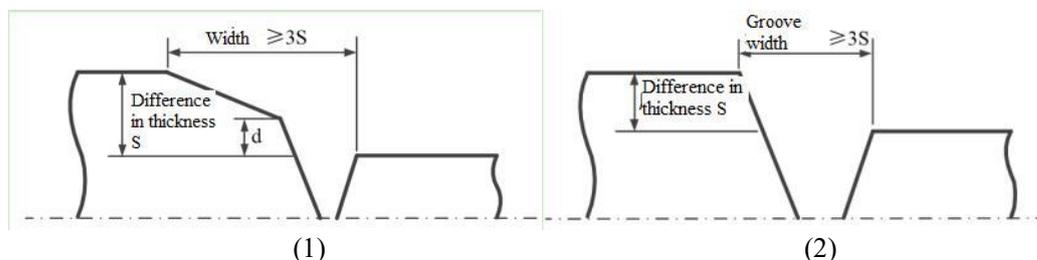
Butt welding of steel plates of different thickness
